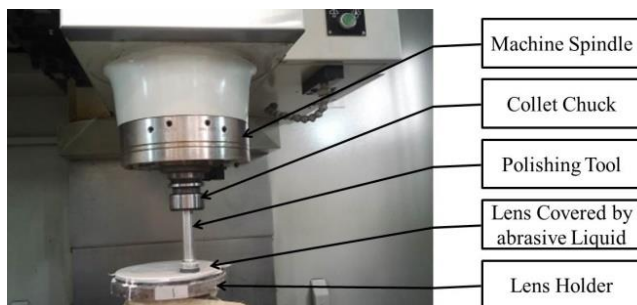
Palno-plano lens under polishing process using a 3-axis CNC machine
